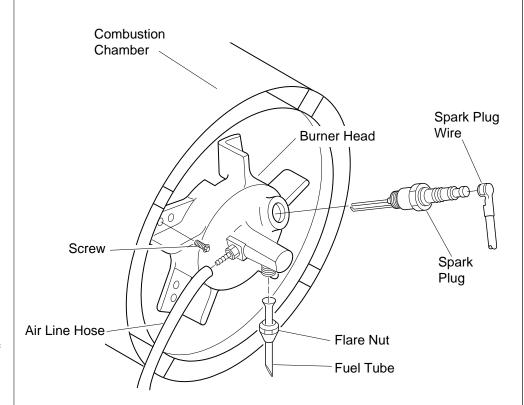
Removing Burner Head, 150,000 BTU/Hr Model
